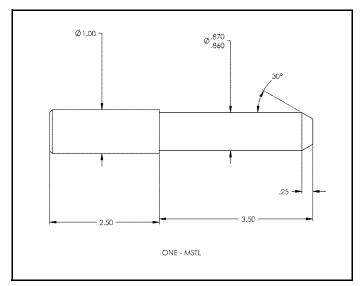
Drift Pin for Lining Up Thrust Washers with Output Planet Gear
